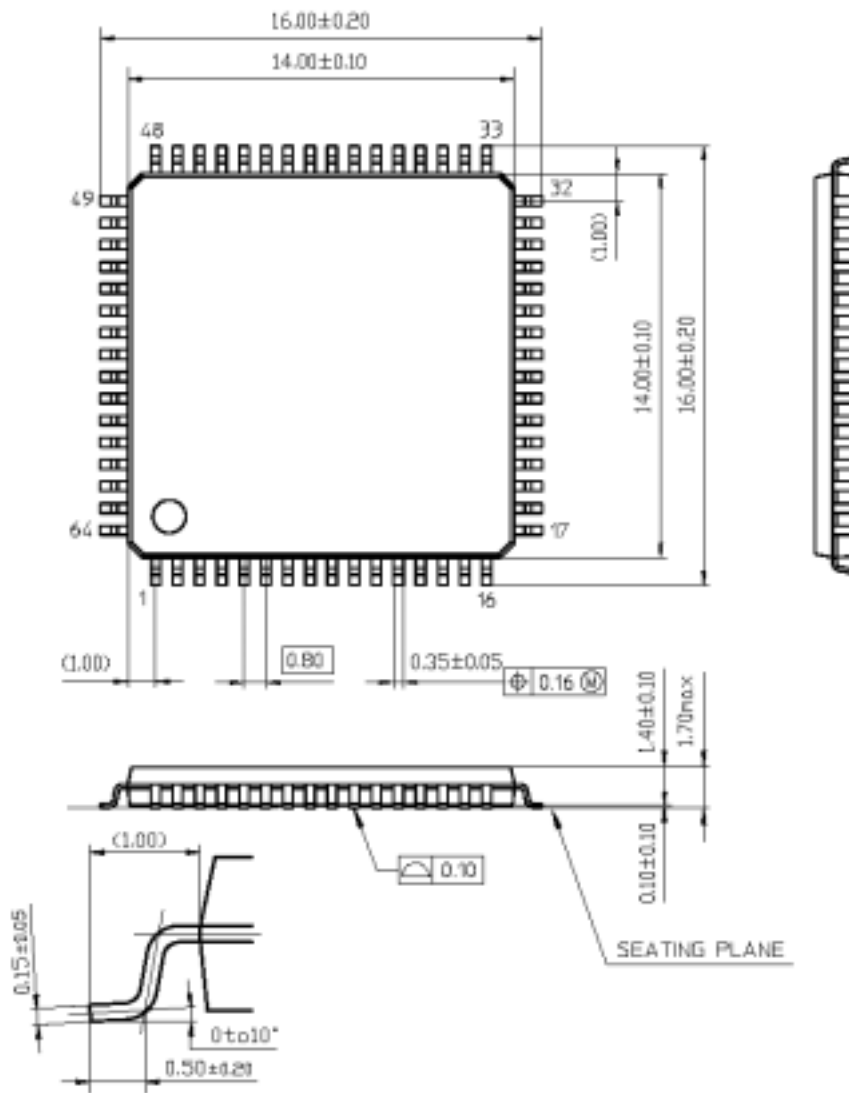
Package Dimension of MN103SFN1/N5 series (LQFP 64 pin)
